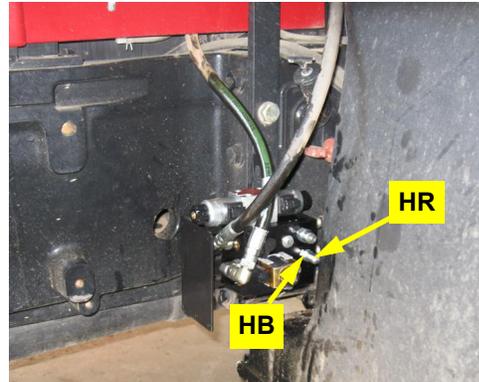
Mounted hydraulic block. LS hose connected. (P & T hoses also shown connected - see step 9c)
